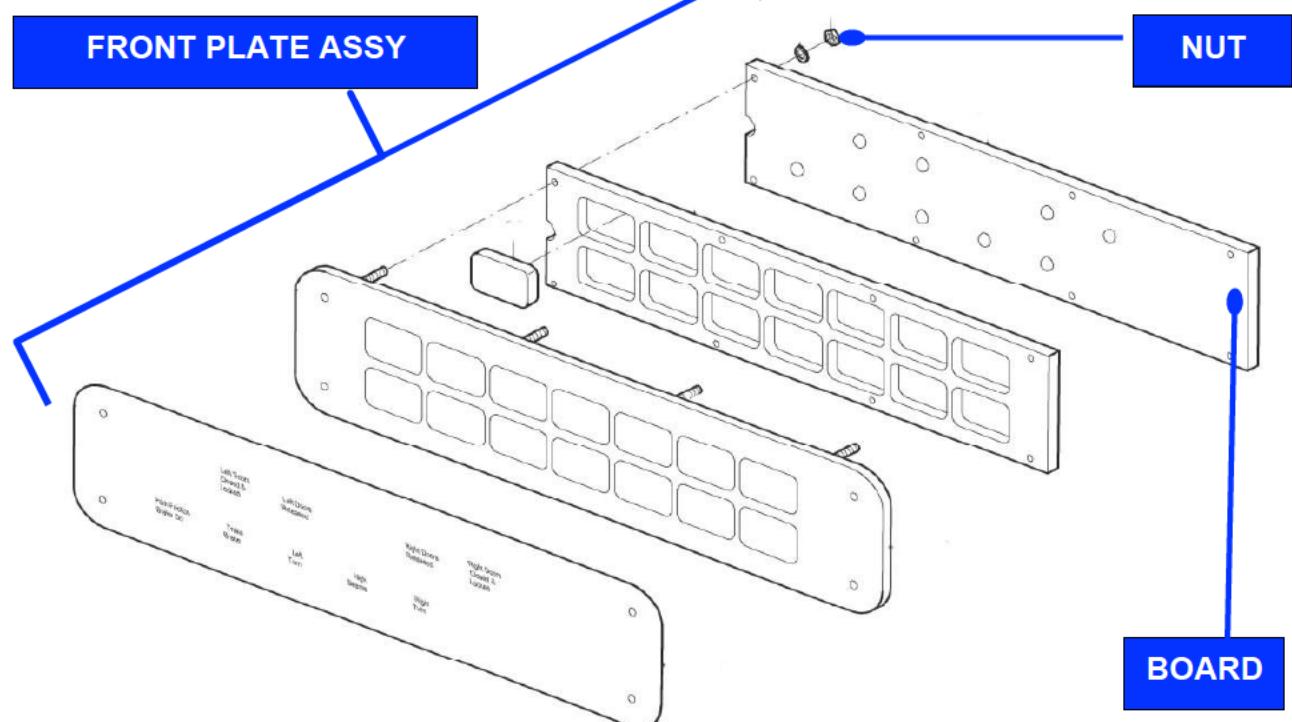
INDICATOR PANEL FRONT PLATE ASSY (A/ B)
